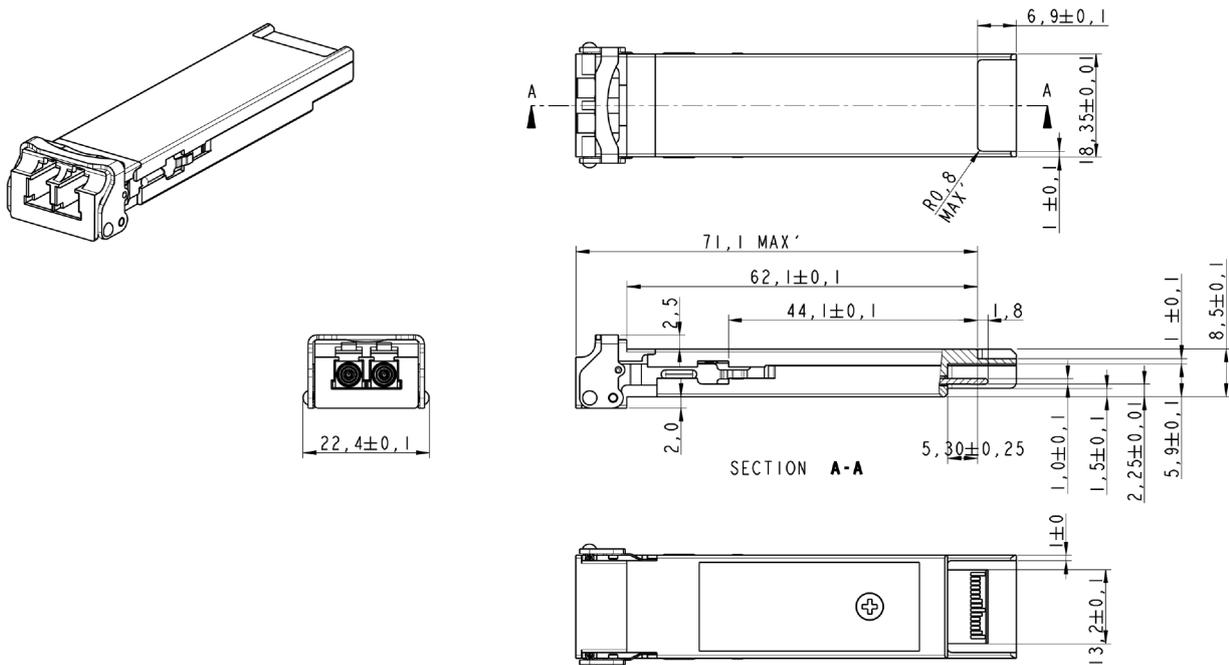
Mechanical Dimensions (mm) of the XFP module.
